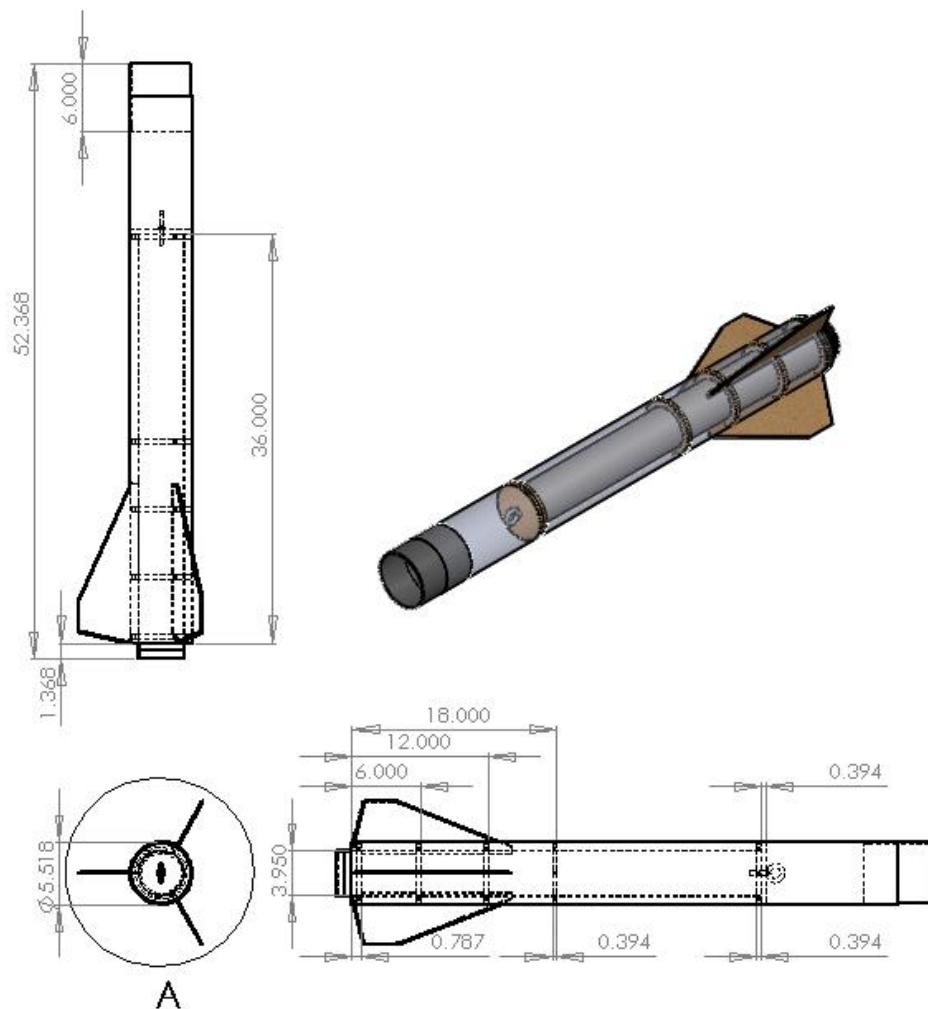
Booster Assembly with Fins and Motor Mount Tube. All dimensions are in inches.
